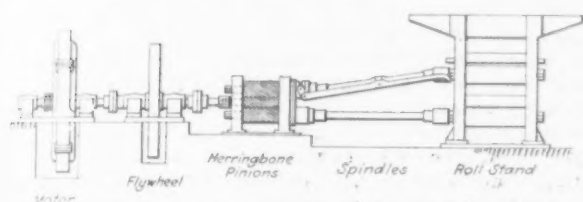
Lauth Type of Three-High Plate Mill with Motor Drive and Flywheel
